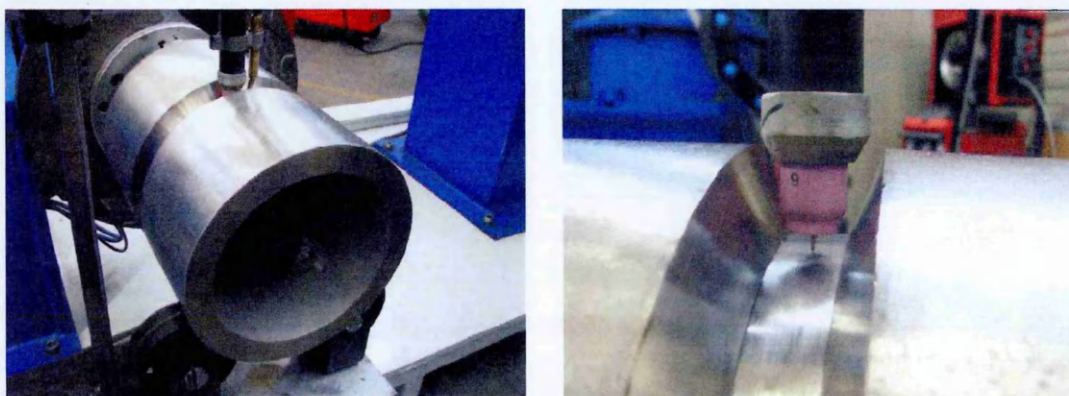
General layout and photographs of STYLE pipe MU4-1 during welding.
